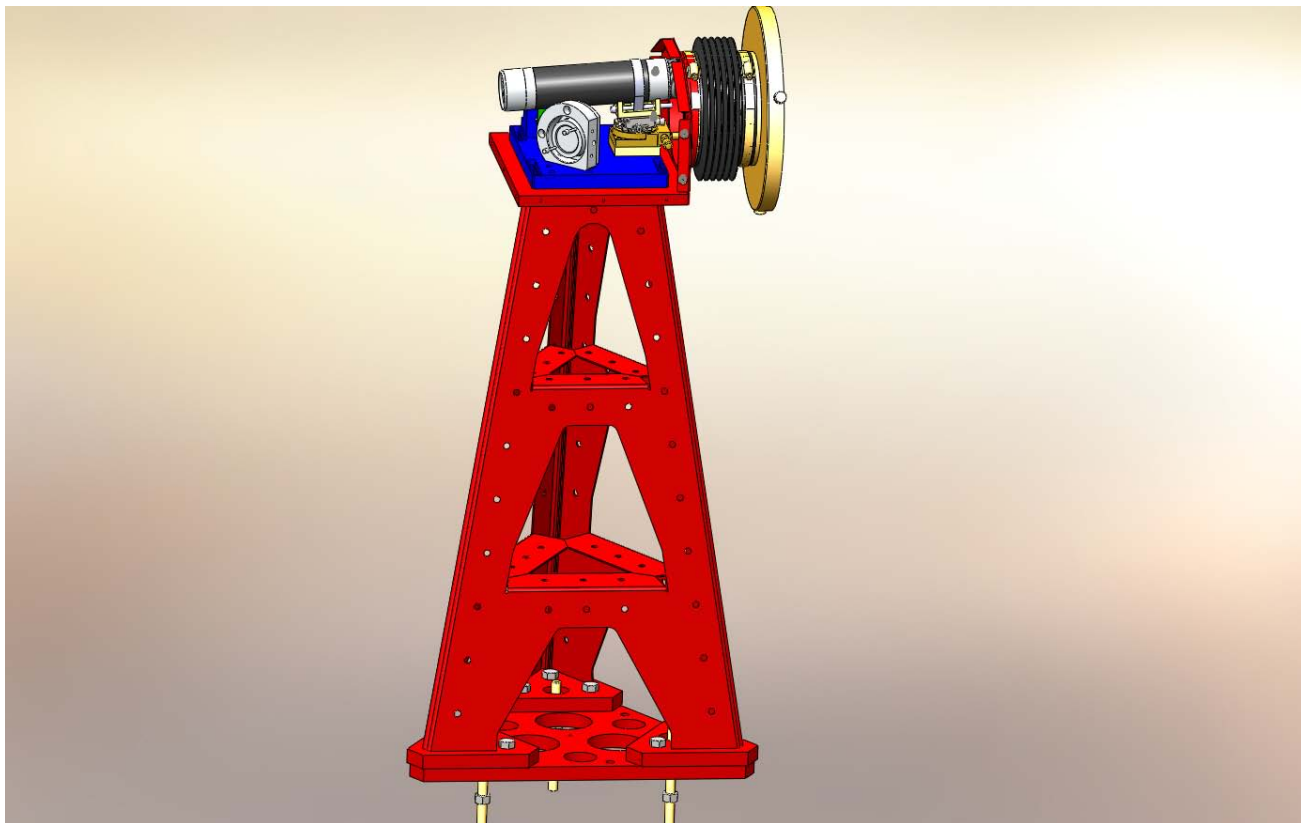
HAM Transceiver Pier Assembly. Shown with cover removed.
